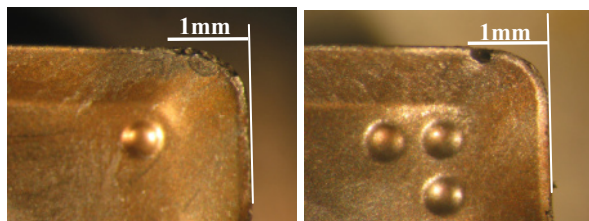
The rake faces of the cutting tools after (a) 3.6 cm^3 of material removed by conventional milling and (b) 8.4 cm^3 of material removed by LAM.
